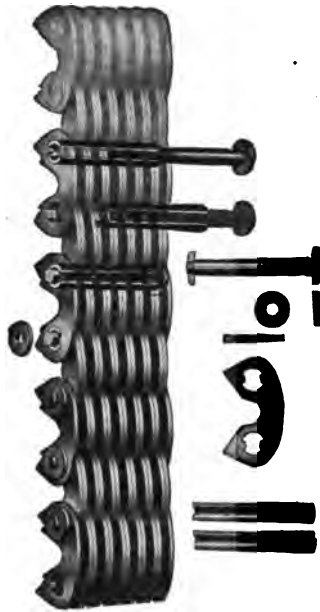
SEC 10h.—The bushed joint of Link-Belt silent chain.
